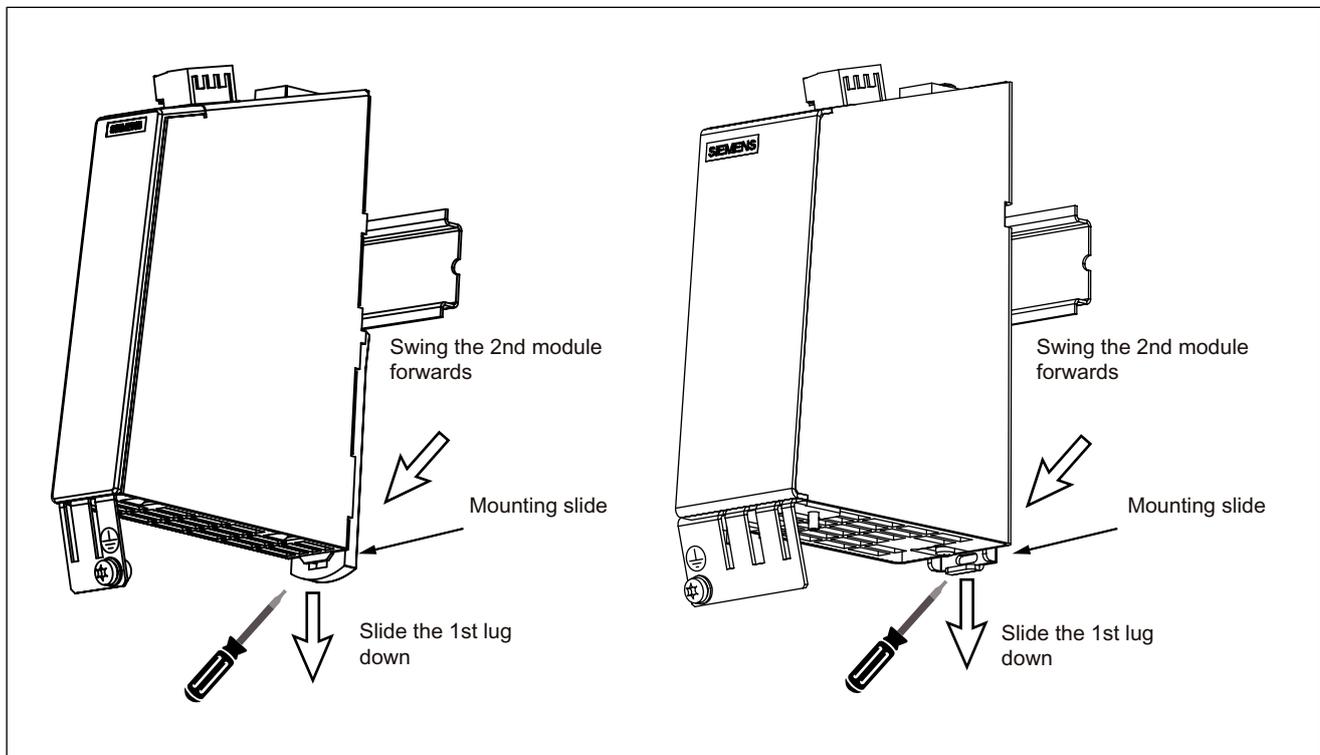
Disassembly of a DIN rail with a 30mm wide component (left) and with a 50mm wide component (right).
